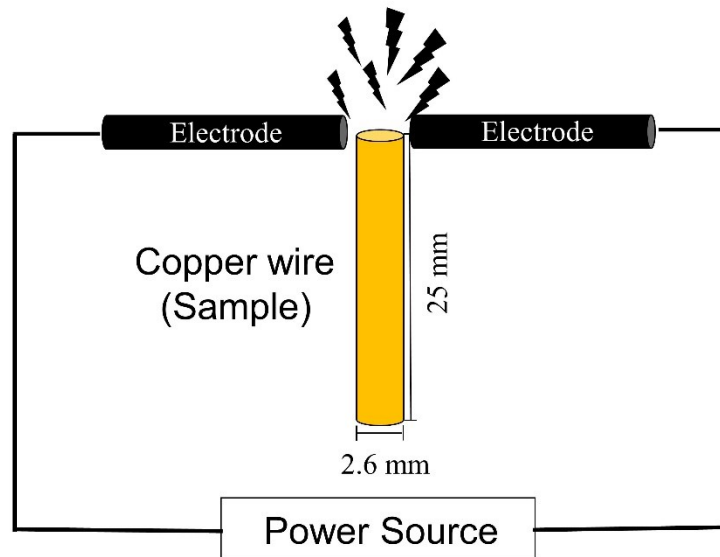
Schematic diagram for copper wire melting by arc welding machine
